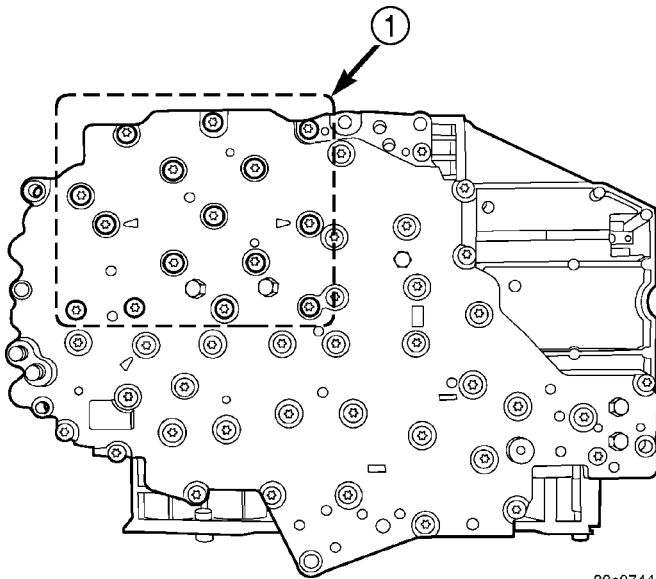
Transmission Solenoid/TRS Assembly Screws
